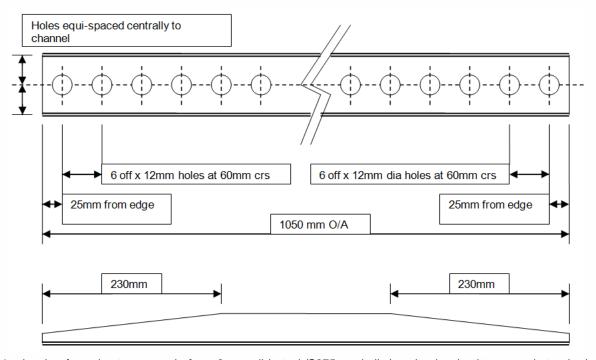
drawing for pole strap - made from 6mm mild steel (S275 or similar) and galvanised to agreed standards - supplier to specify standard used
